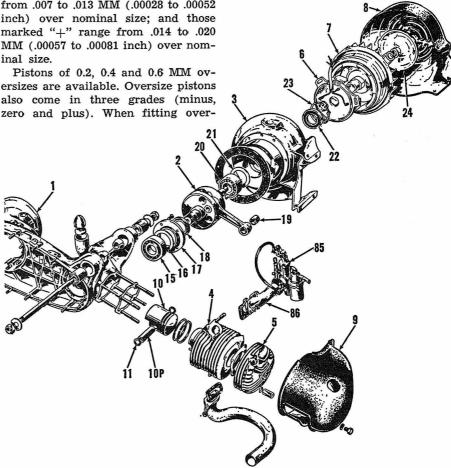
Exploded view of the engine assembly. The crankshaft and rod units are available only as an assembly (2). An early model is shown.
